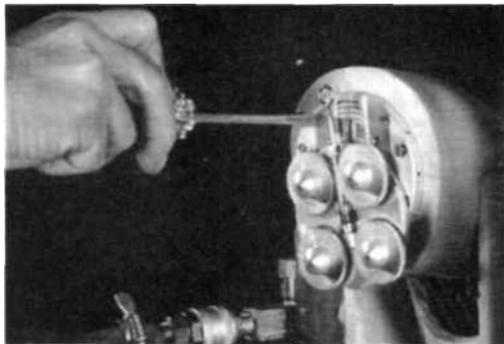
Attaching the bottom assembly of the coupling to the top surface of the knee block.
